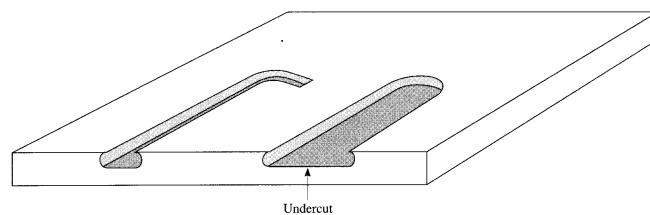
Undercut design for a shipping tray that can be made with a single-piece thermoforming mold.
